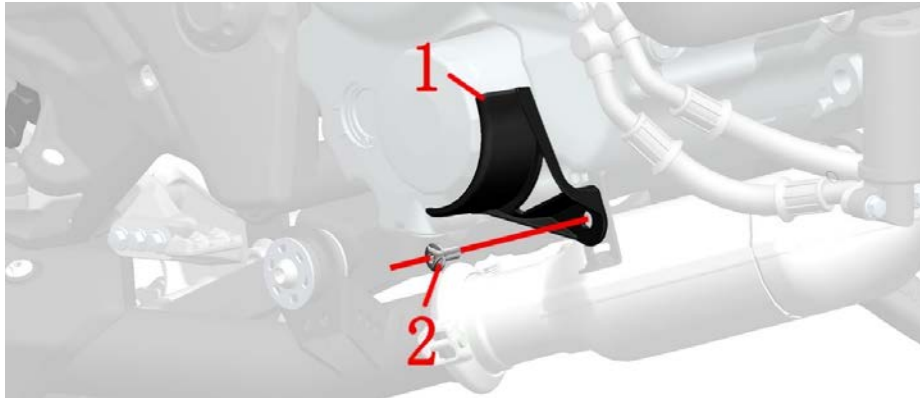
Lower Cowling Assembly		Lower Cowling Assembly 2		CHK
